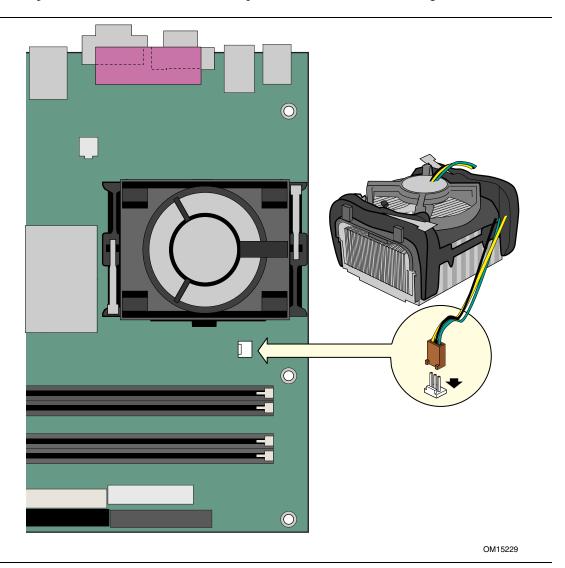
Connecting the Processor Fan Heat Sink Cable to the Processor Fan Connector
